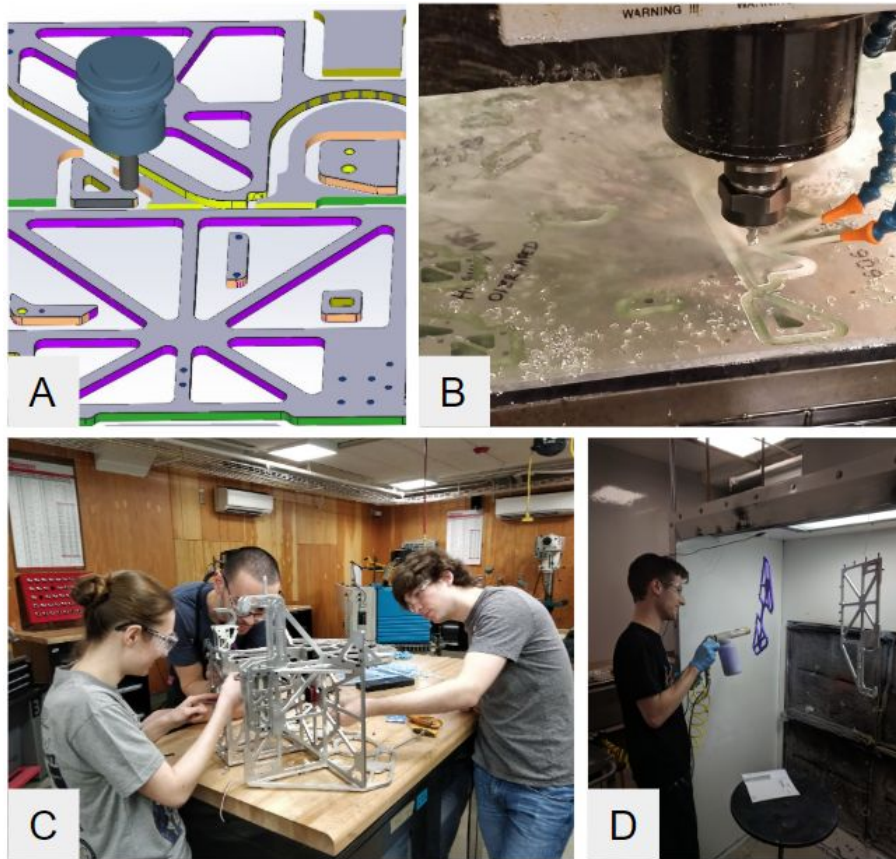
Frame manufacturing process: CAM and programming(A); machining frame parts out of aluminum plate (B); post machining and dry assembly (C); powder coating before final assembly (D).
